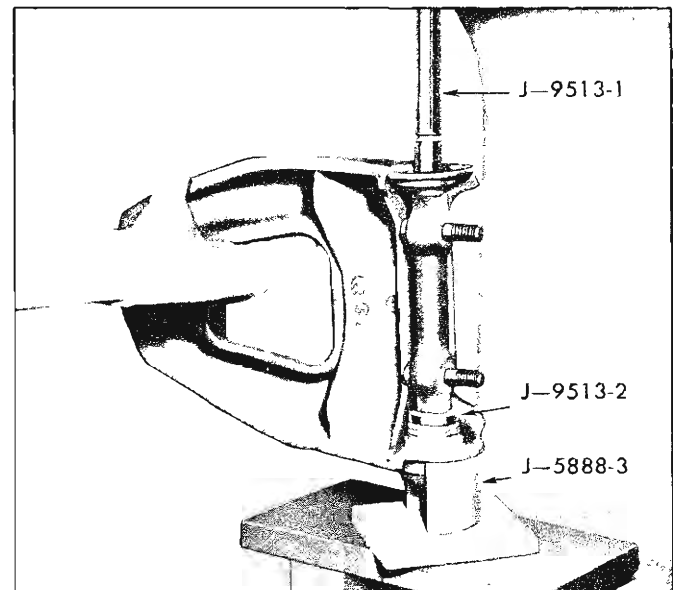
Removing Remaining Pivot Shaft Bushing—Chevy II
